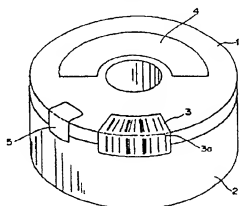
Figure 2 is a perspective view showing a roll connector in which the sealing sticker of the present design is attached.
